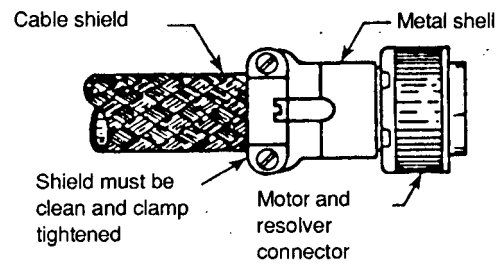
Grounding of Shield to Motor Connector at Drive Side
